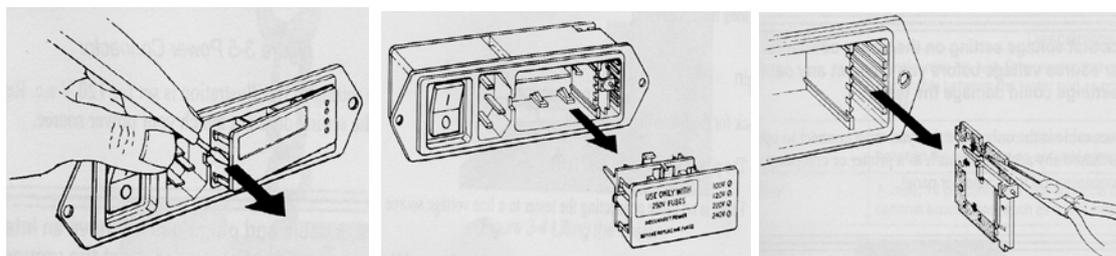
Pry out fuse holder Figure 3-9 Remove fuse holder Figure 3-10 Remove Voltage selector
